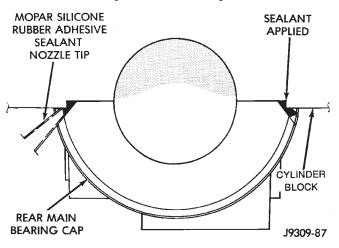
Apply Sealant to Bearing Cap to Block Joint UPPER SEAL —CRANKSHAFT INSTALLED
